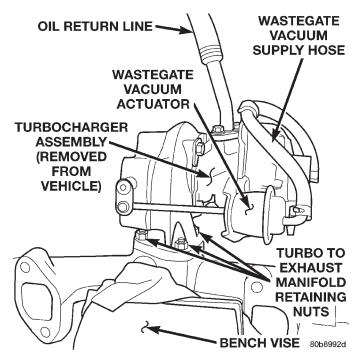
Turbocharger / Exhaust Manifold Assembly
